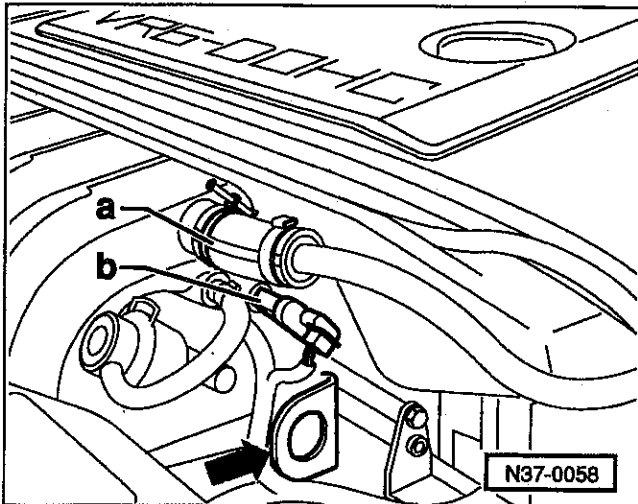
Remove vacuum hose (a) and intake air temperature sensor (b) to prevent damage when lifting out engine. Rear lifting eye shown at arrow.
